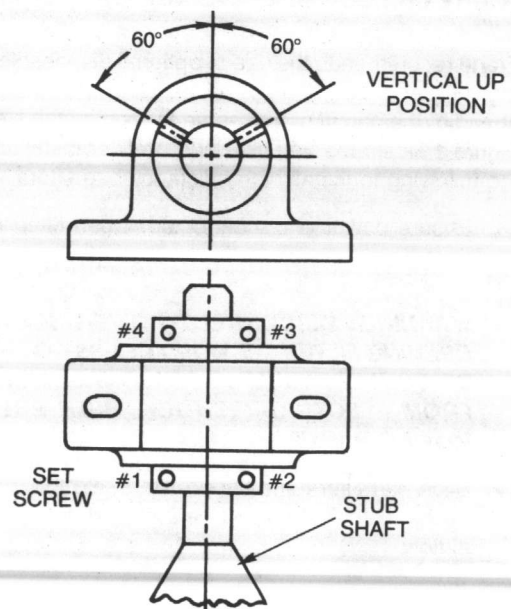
Instruction Sketch for Pillow Block Bearing with Double Lock Setscrew
